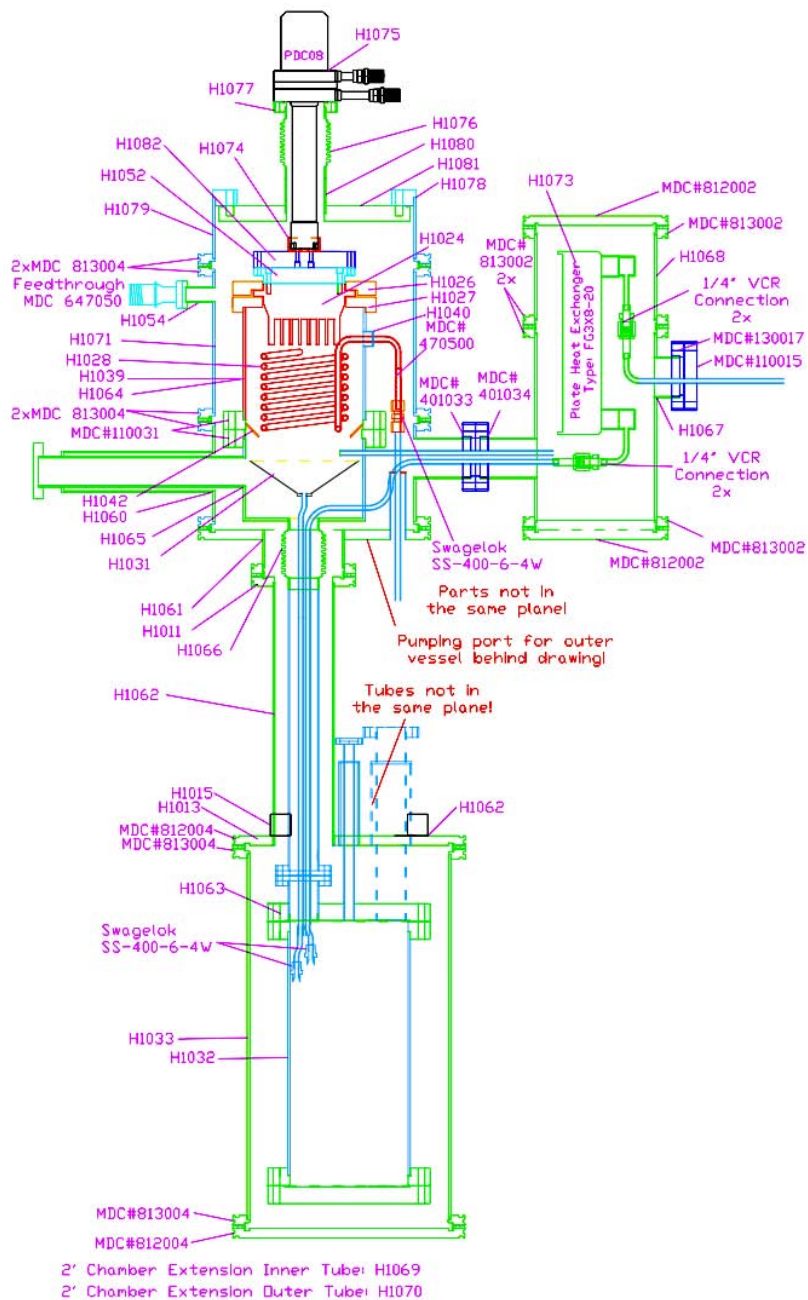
A schematic of the MiX cryostat. The inner vessel (H1032) is located at bottom with a cooling head (H1024) at top. The heat exchanger (H1073) is located at right. The system is a custom vacuum-jacketed stainless steel arrangement which ensures a low heat load. Design and drawing courtesy of Karl Giboni.
